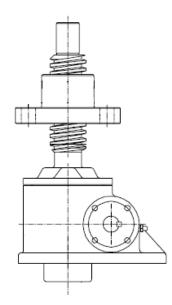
Rotating type screw jack (Power Jack catalogue)
